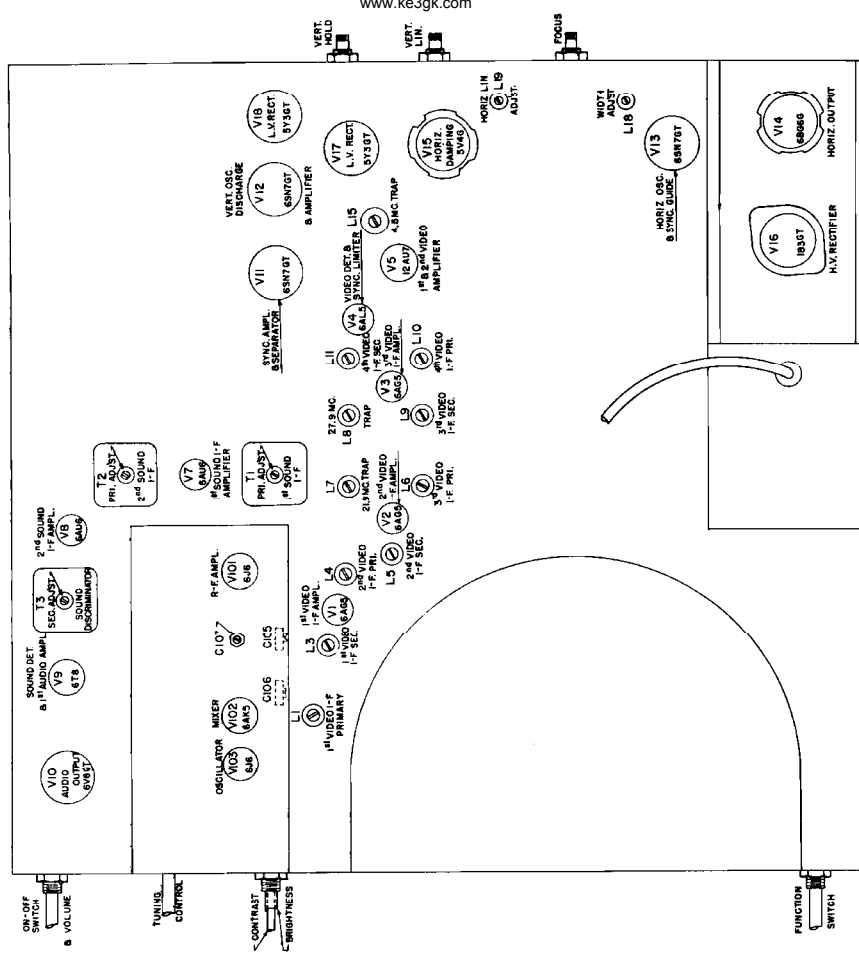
Chassis Top View Showing Tube and Alignment Locations
